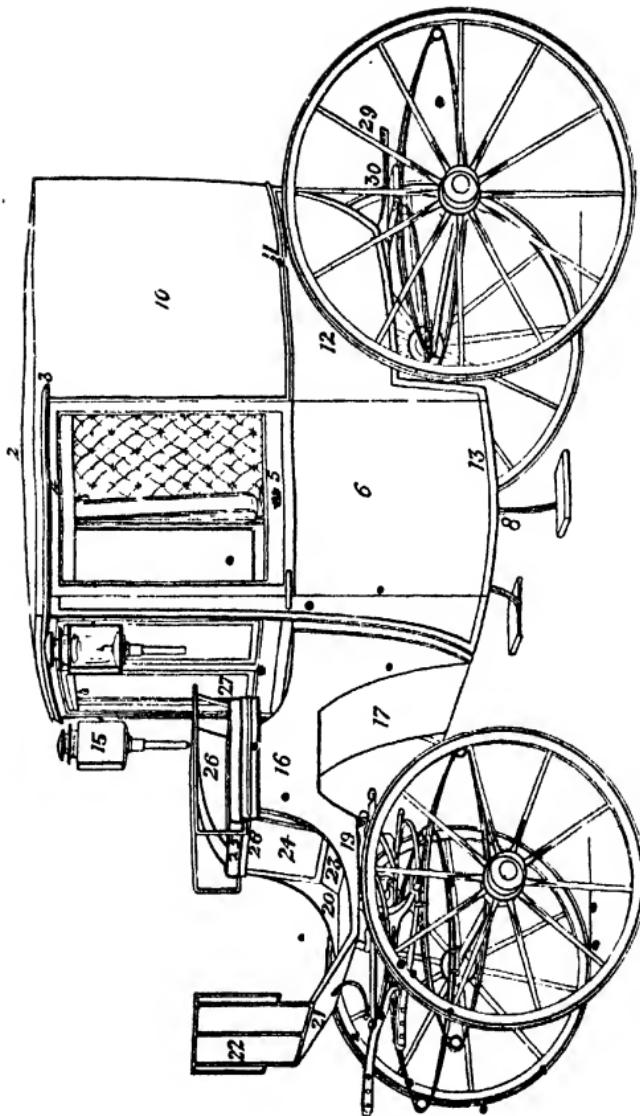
SINGLE BROUGHAM ON ELLIPTIC SPRINGS.
